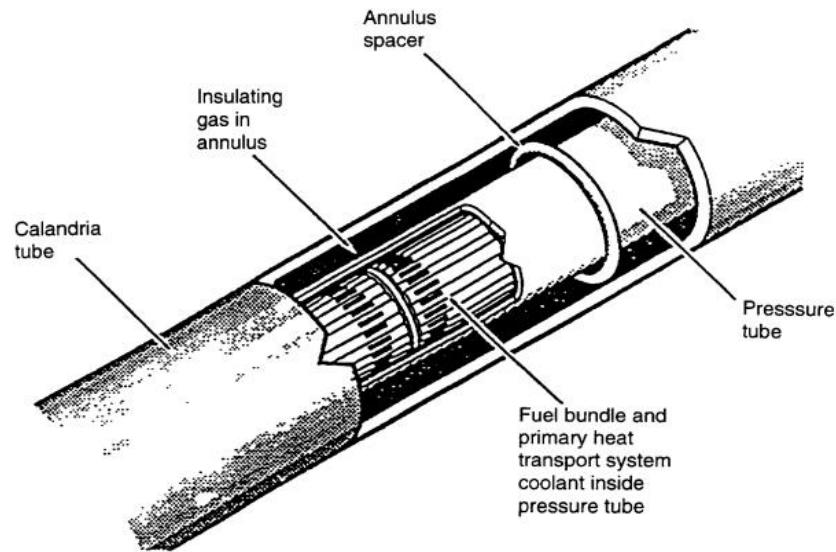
CANDU® Reactor Fuel Channel Assembly [10]
